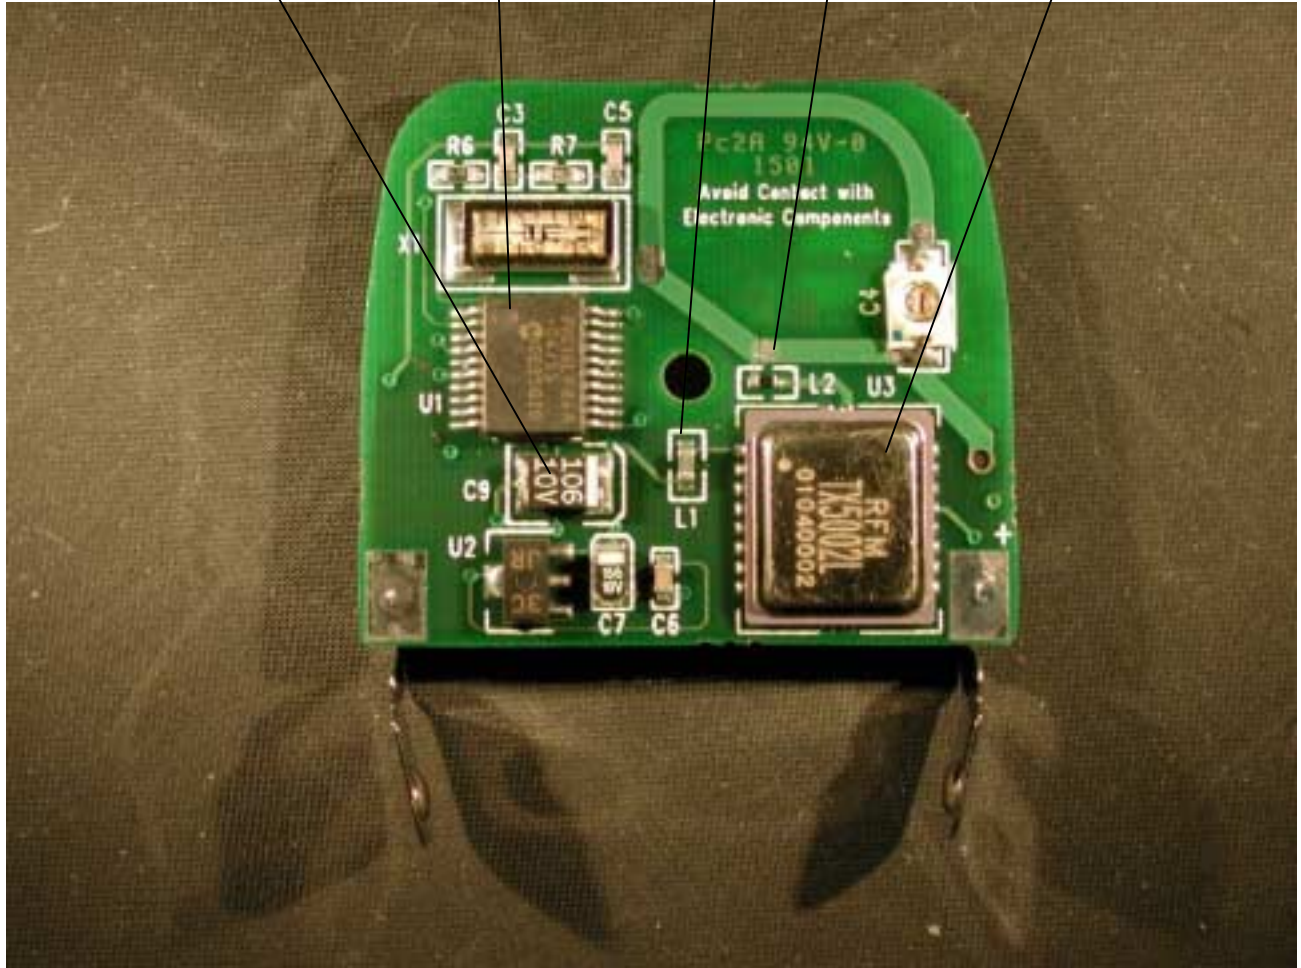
MMT500 508 Remote Transmitter PCBA - Front
